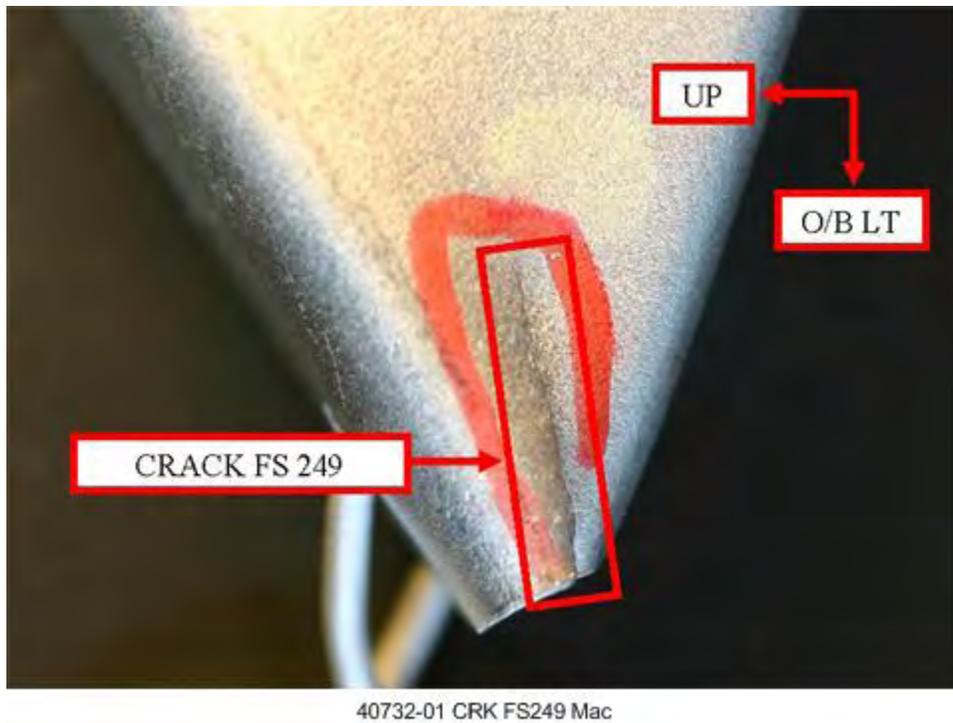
Macroscopic View of Crack on the Bulkhead Right Aft Fuselage FS 249
